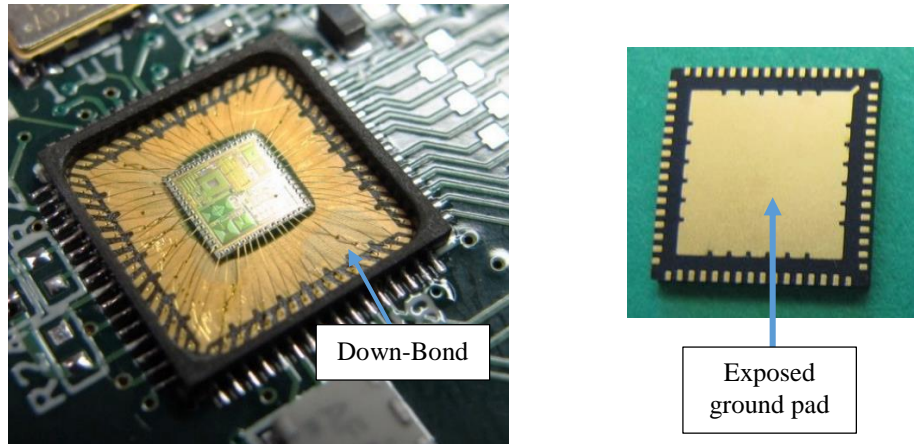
(a) Photograph of the KSU Micro-Transceiver Radio showing the bond wires in a QFN style package. (b) Photograph of the bottom of the QFN package.
